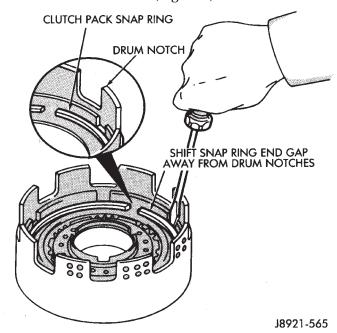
Adjusting Clutch Pack Snap Ring Position
